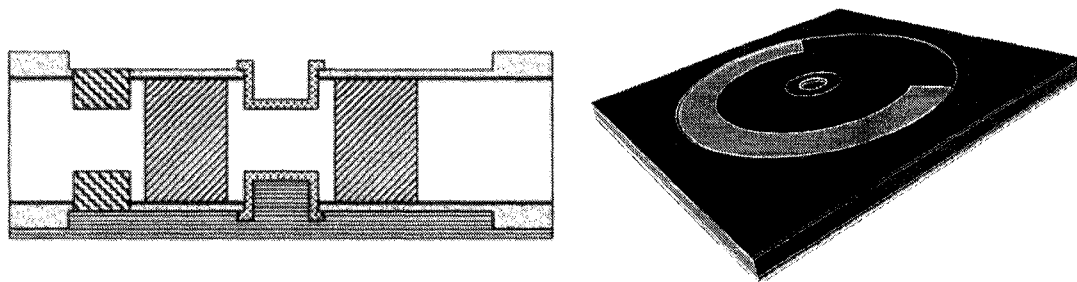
Rotor fabrication step 13 – deposition of bottom sacrificial SU-8 layer.
